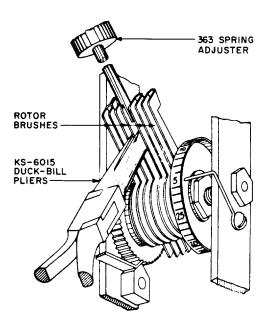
Method of Adjusting for Rotor Brush Heel Shape
